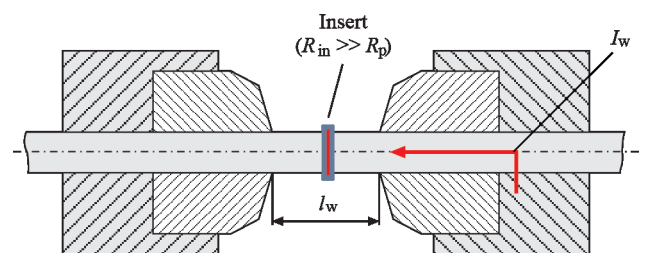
Scheme of the resistance heating process through an intermediate insert in the current-carrying clamps of the machine for FBW (l_w — tolerance for welding)
